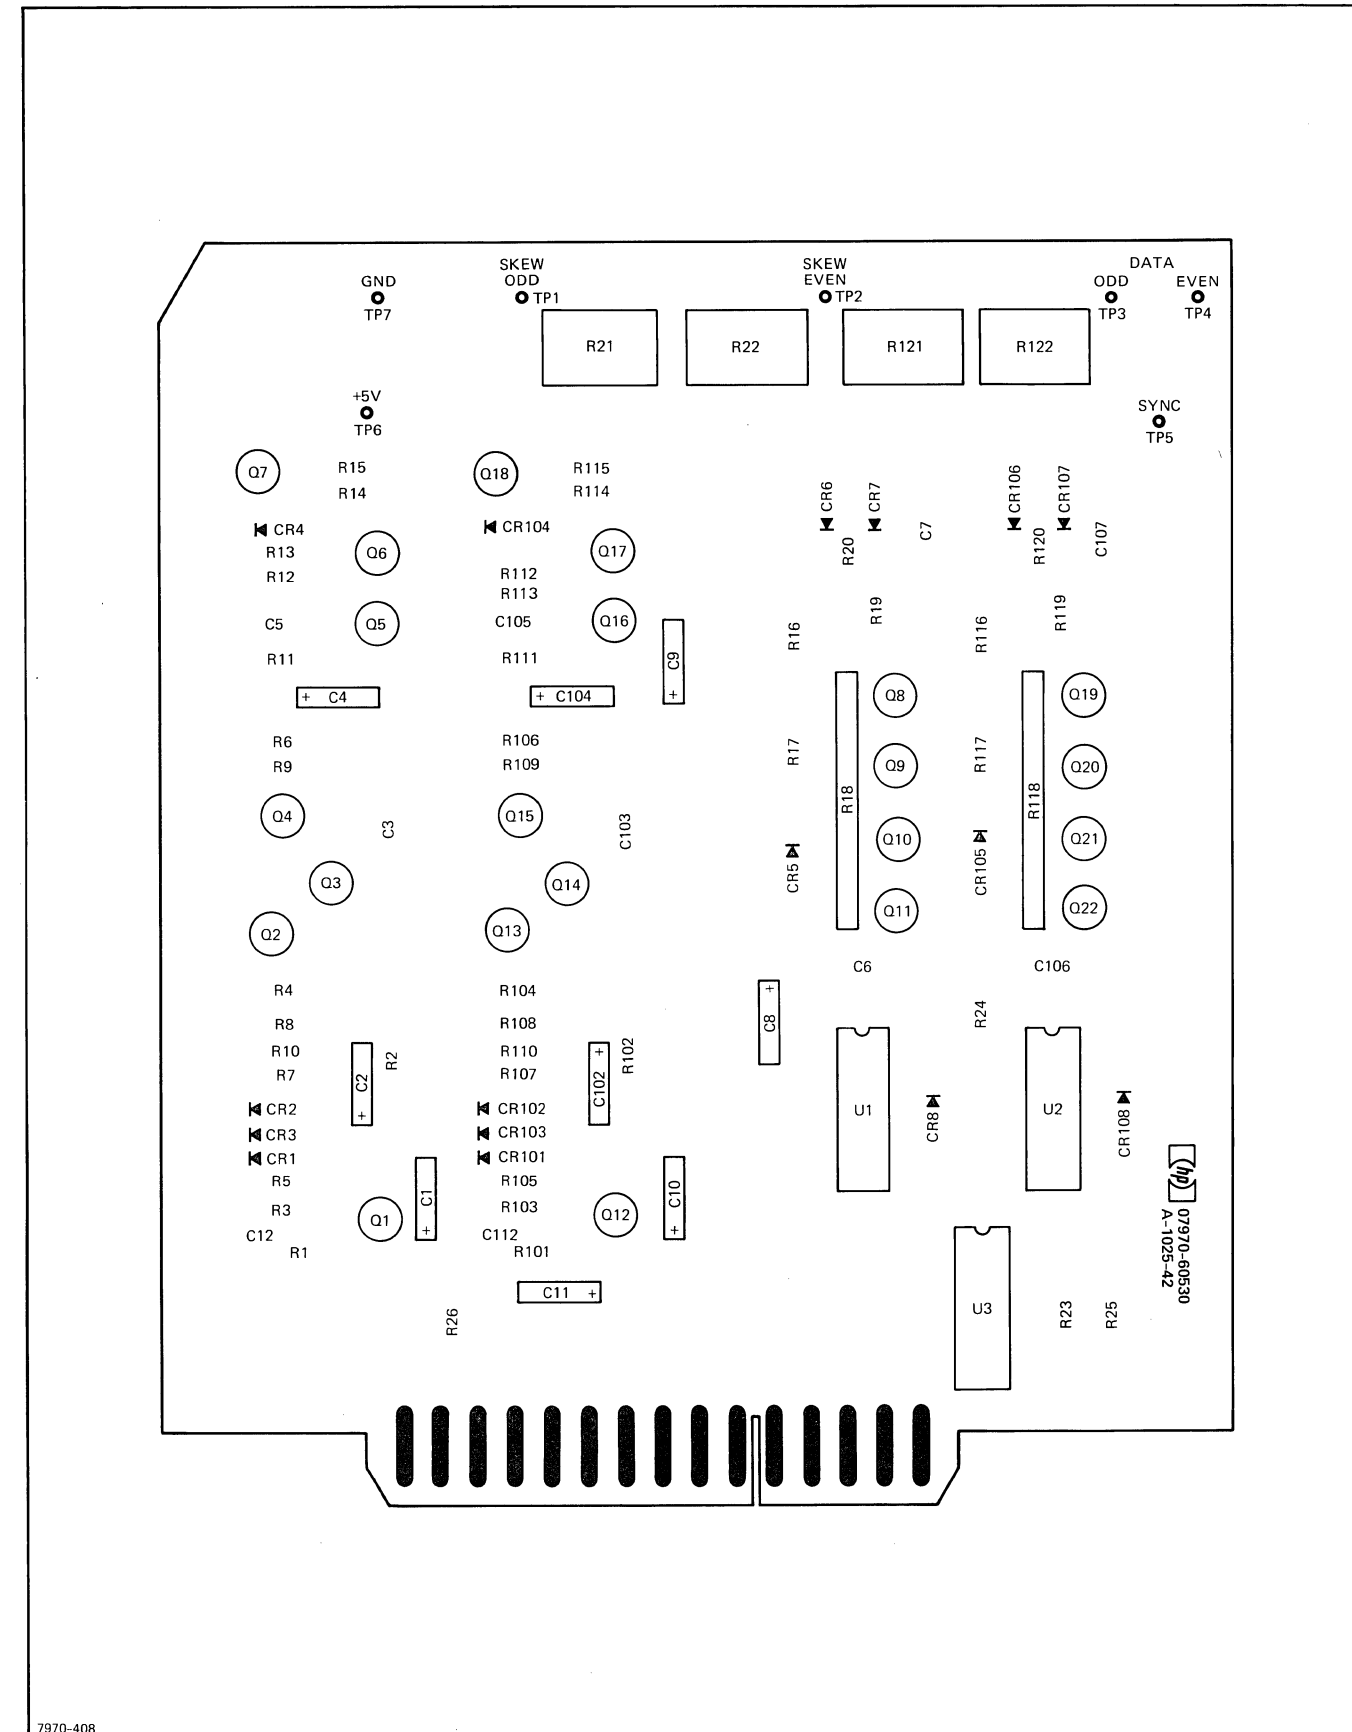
Dual-Channel Read Data PC Assembly (21 - 45 ips), Parts Location Diagram
